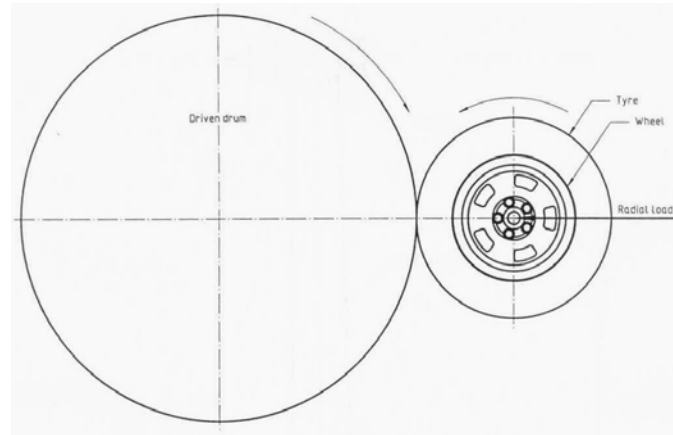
The schematic diagram of fatigue loading of the automotive welded wheel
